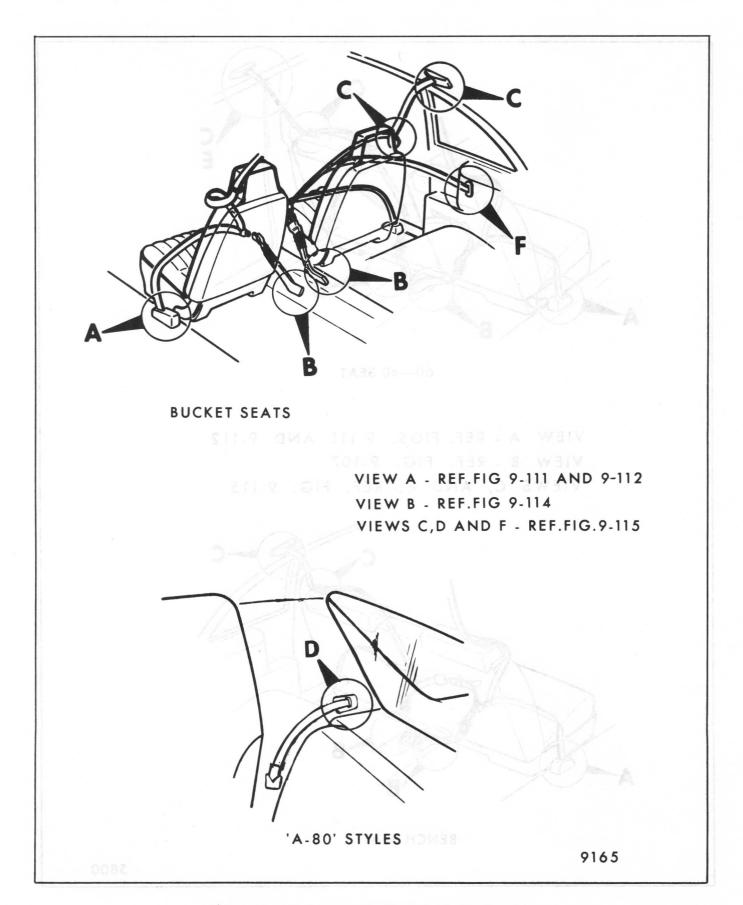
Front Seat Lap and Shoulder Belt Attaching Locations
